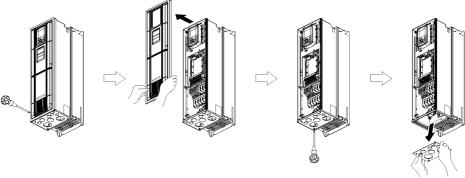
Removing the Front Cover and the Wiring Plate (FRN37AR1M-4U/ FRN050AR1M-4U)
